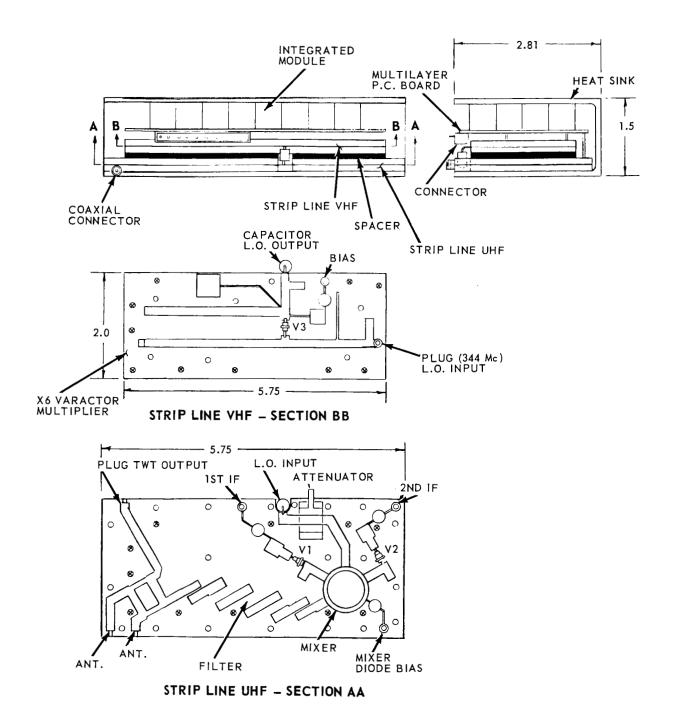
(a) Command Receiver Assembly Arrangement
